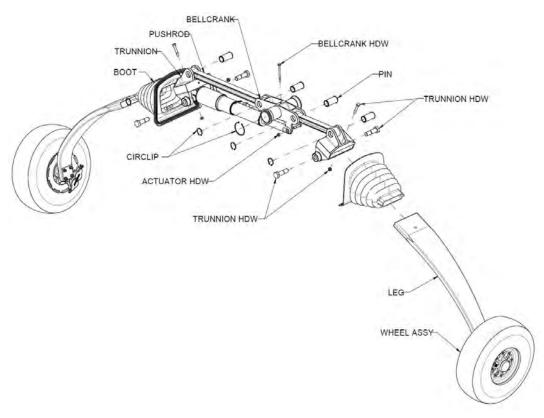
MAIN LANDING GEAR ASSEMBLY DETAIL.
